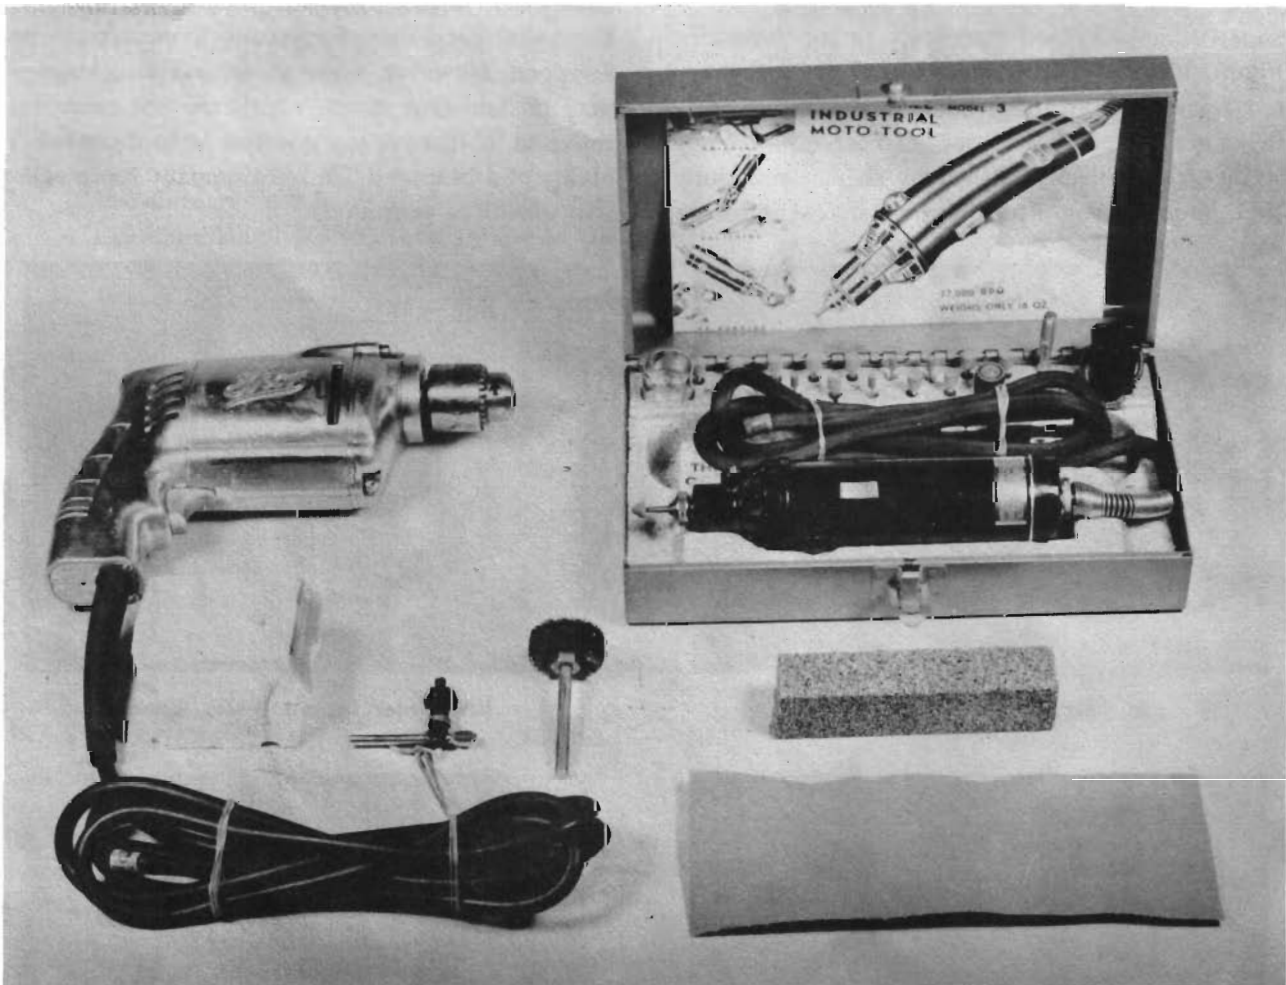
Tools and Material Required for Repairing Roller Bearing Cups.
